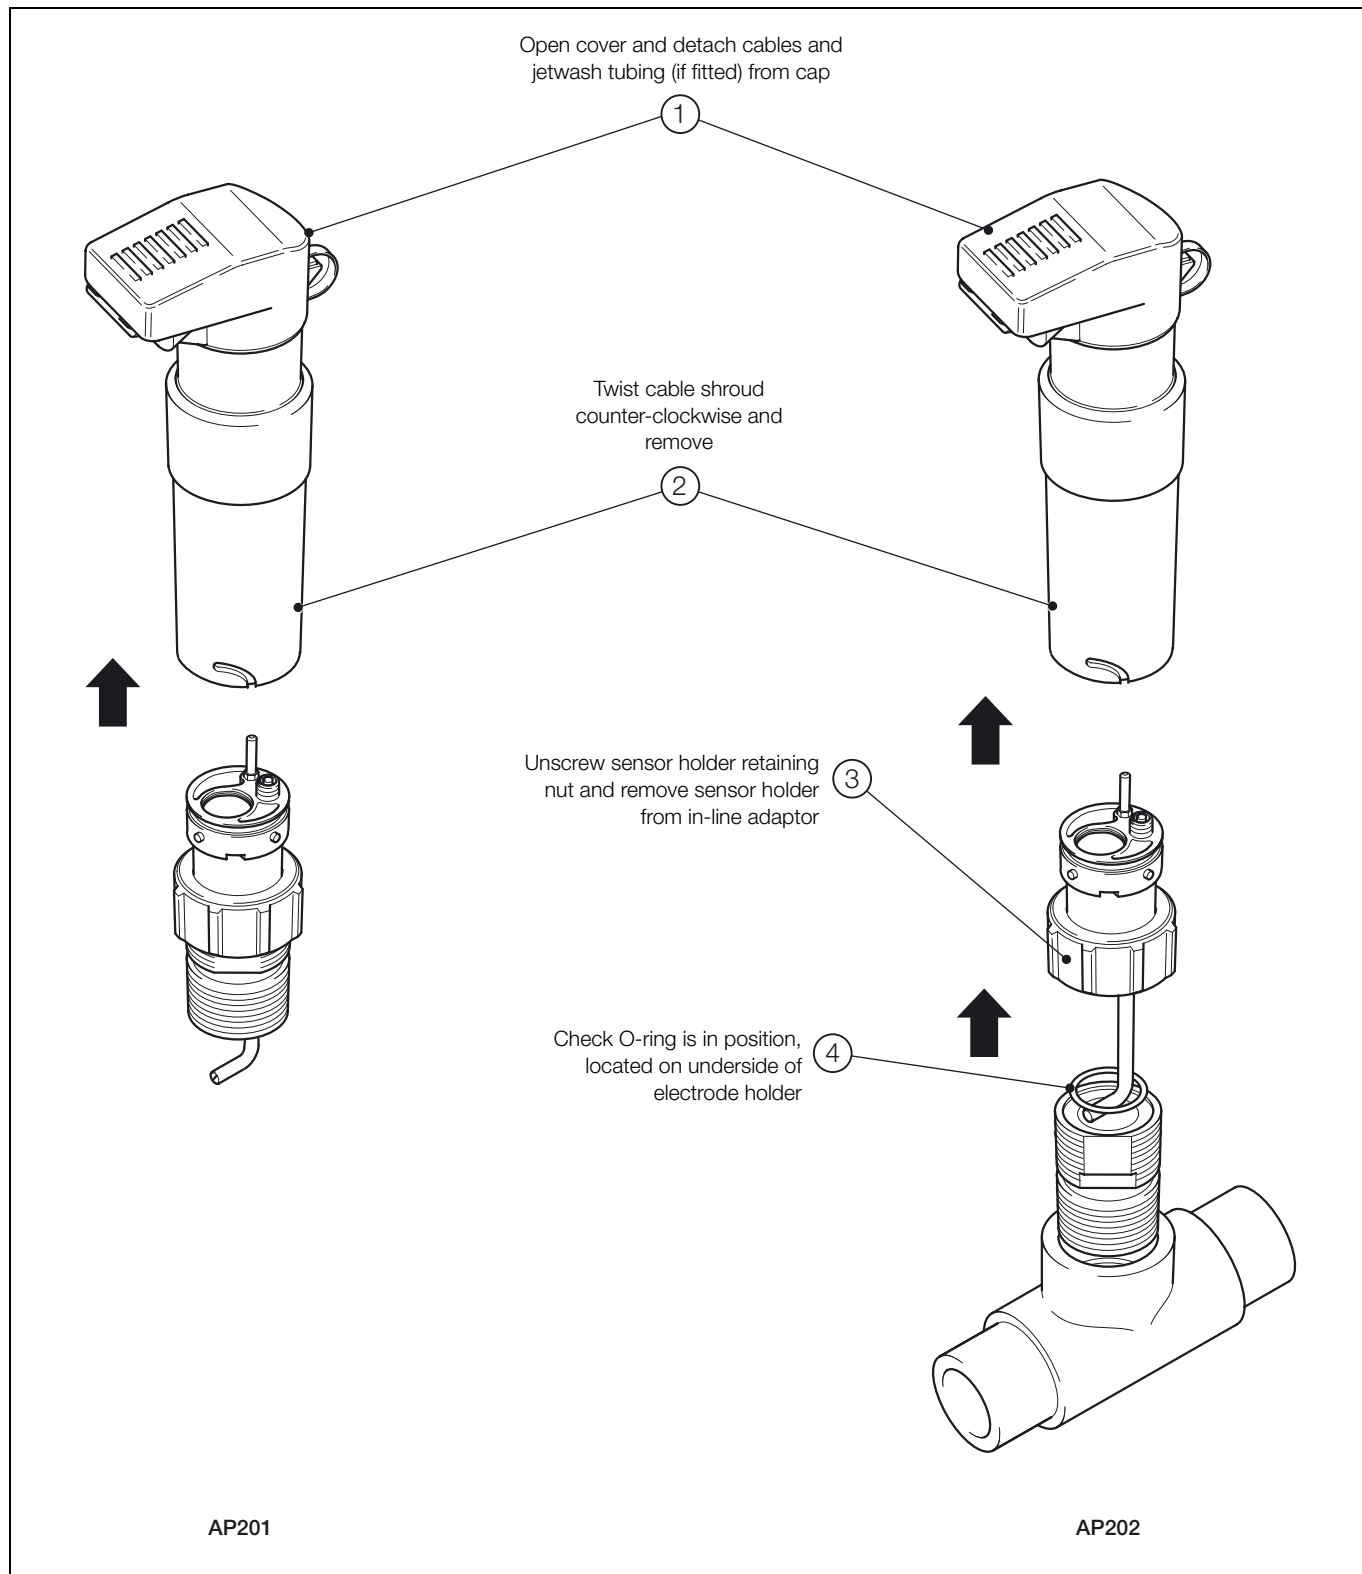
Models AP201 and AP202 – Removing the Sensor Holder
